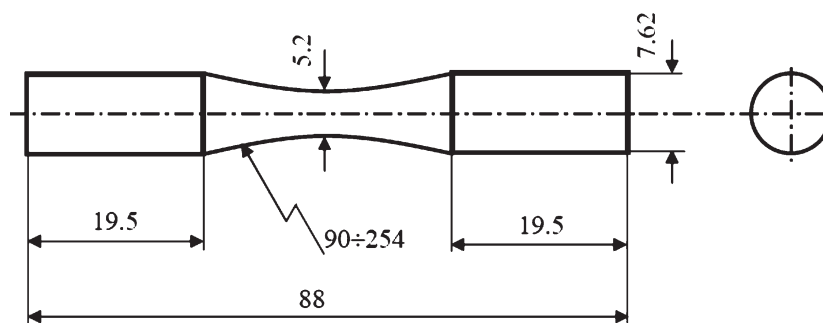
Rotating bending fatigue test specimens, dimensions are in millimeters.
